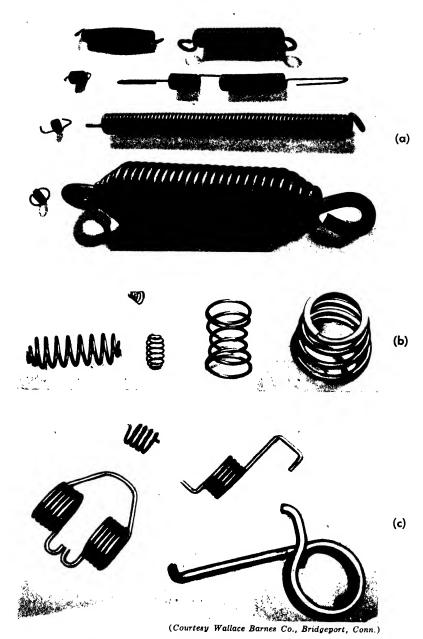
(a) Extension springs. (b) Compression springs. (c) Torsion springs.
